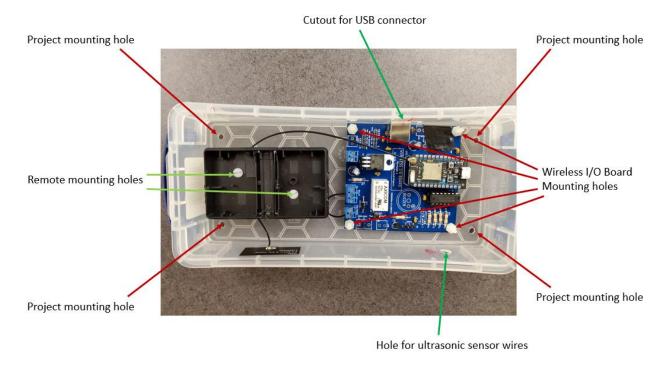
Mounting electronic Parts in the Project Enclosure.
